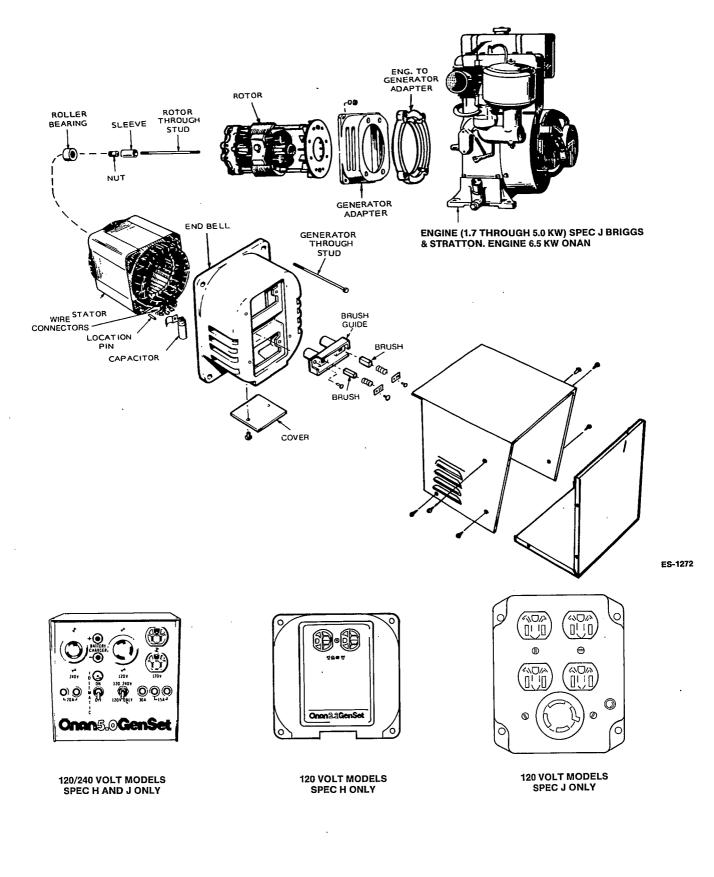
TYPICAL EXPLODED VIEW OF ALTERNATOR (SPEC H AND J ONLY)
